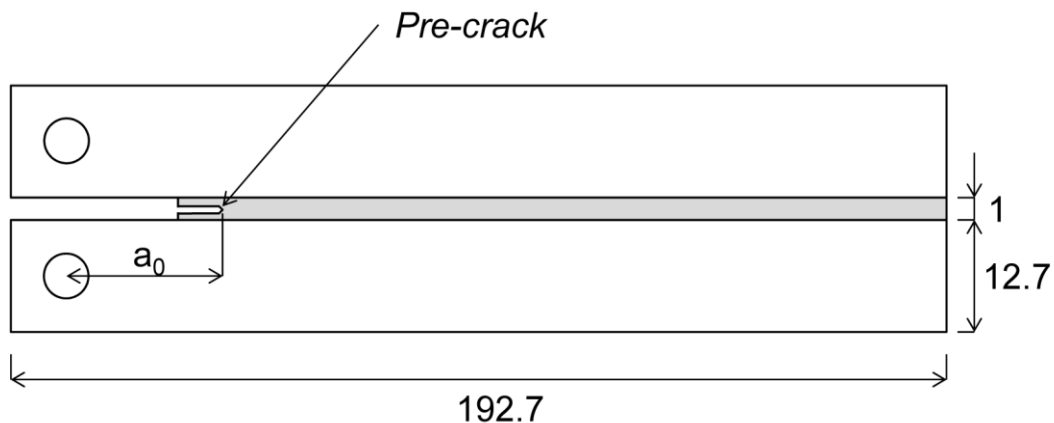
Double Cantilever Beam specimen (dimensions in mm)
